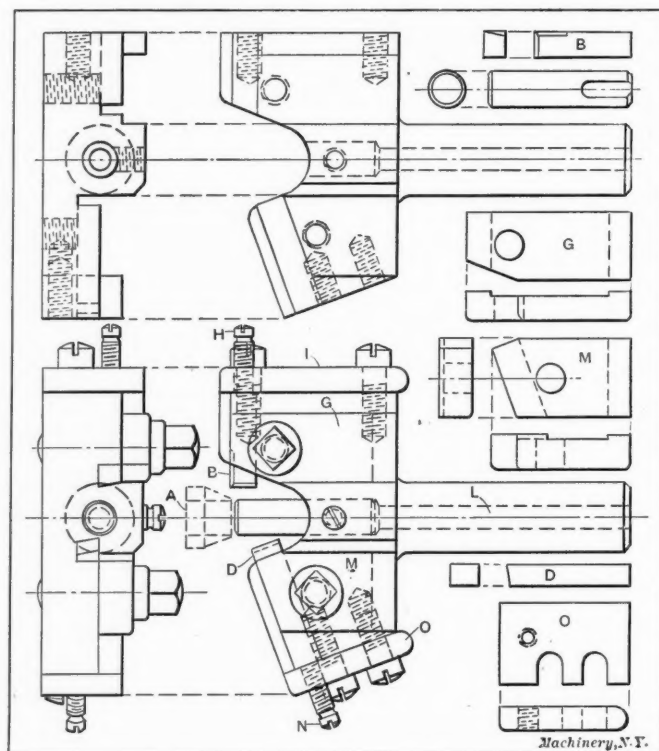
Box-tool for Finishing Treadle-rod Cone
